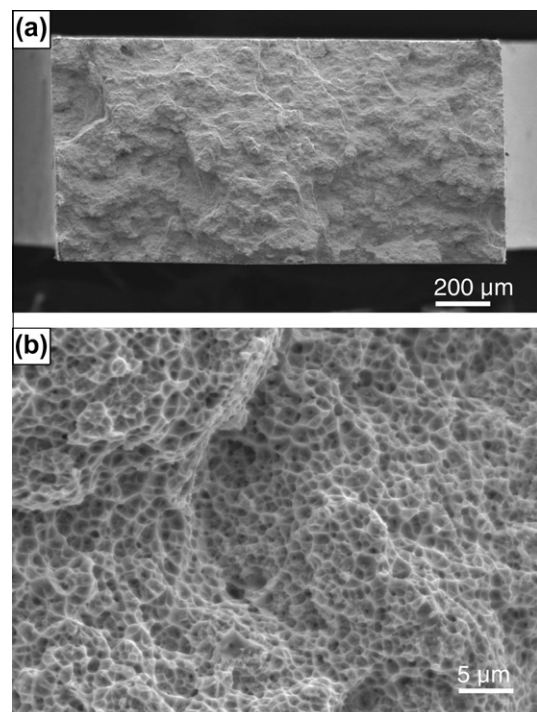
Fractographs of 14YWT tension tested at 800 °C: (a) a macro-view showing little lateral contraction and (b) magnified view for dimple structure.
